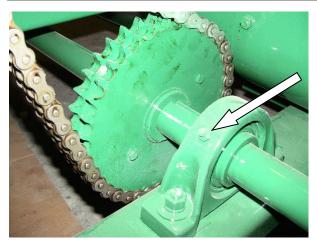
Mixer Drive Shaft Bearing, Rear (Shield Removed For Clarity).
